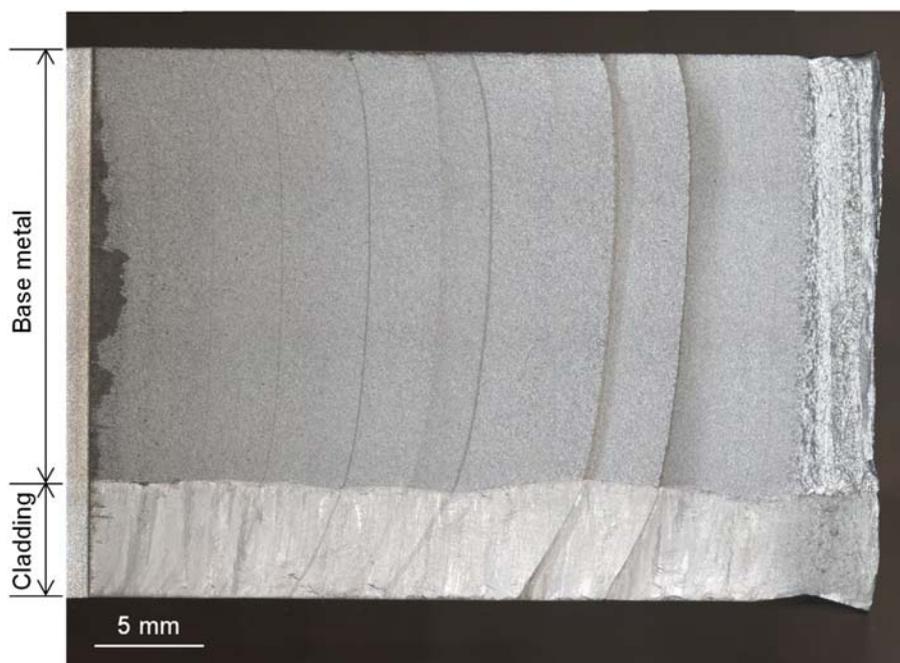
Fracture surface of cladded compact tension specimen.
